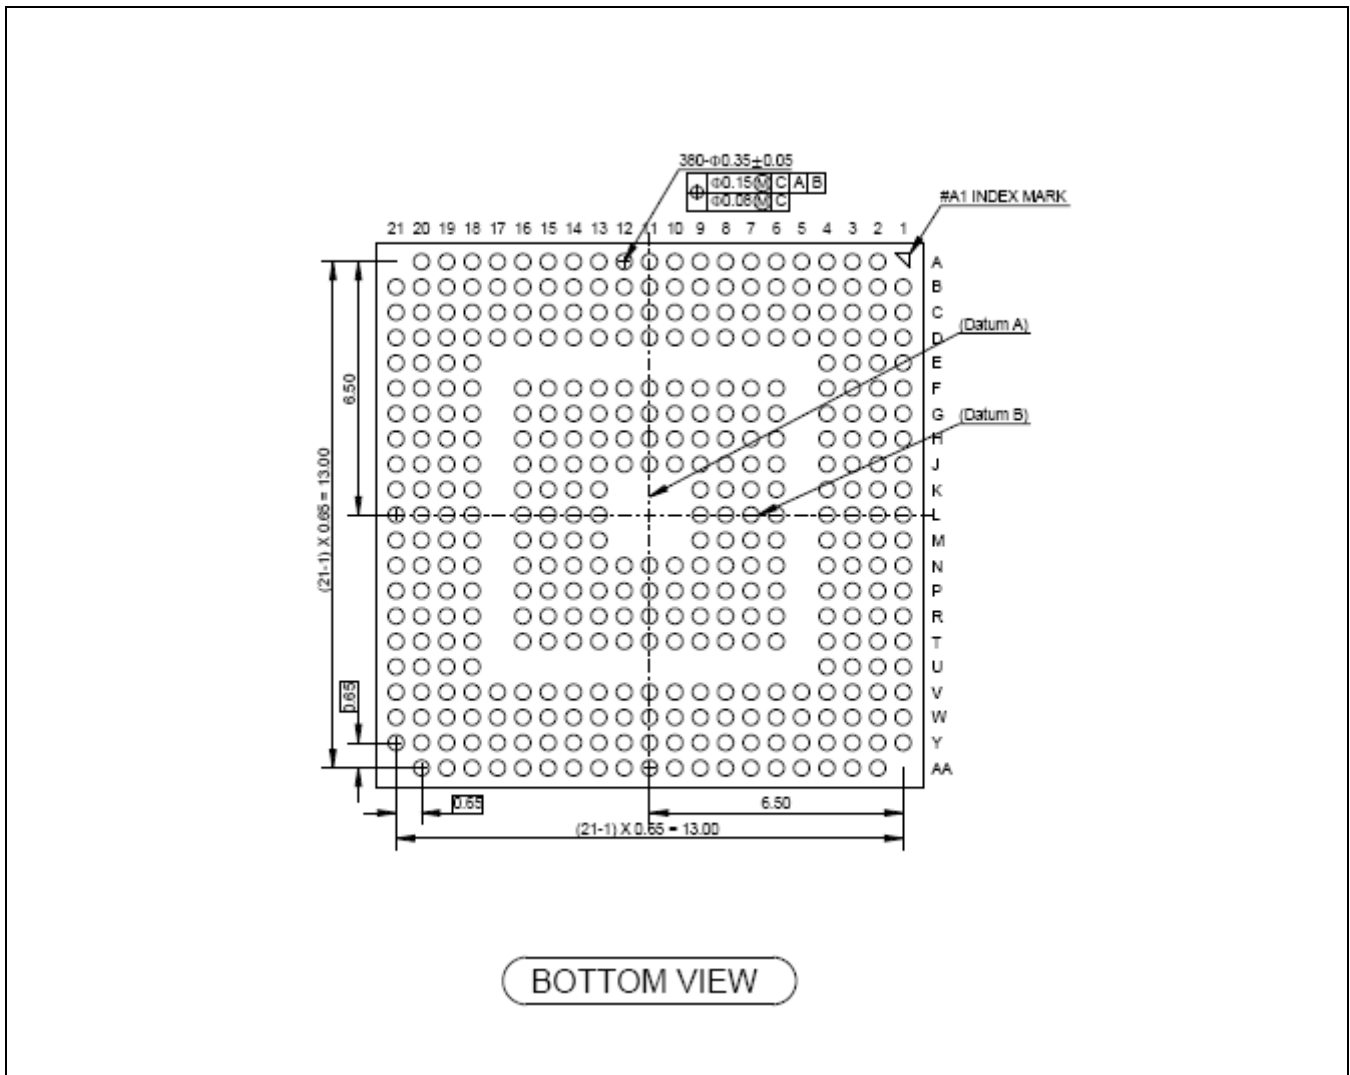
380-FBGA-1414 Package Dimension 2 (Bottom View)
